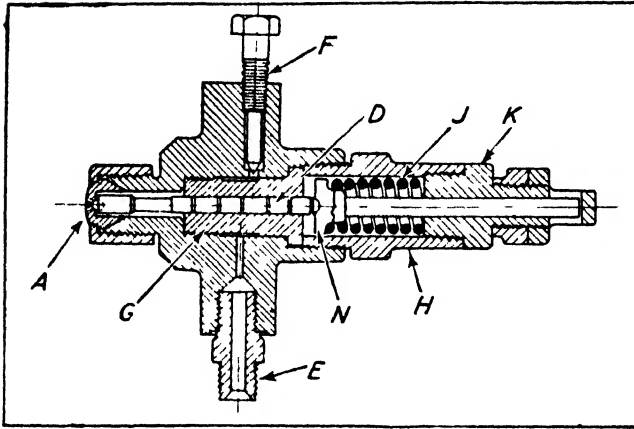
A SECTIONAL VIEW OF THE ROBEEY SPRAYER
